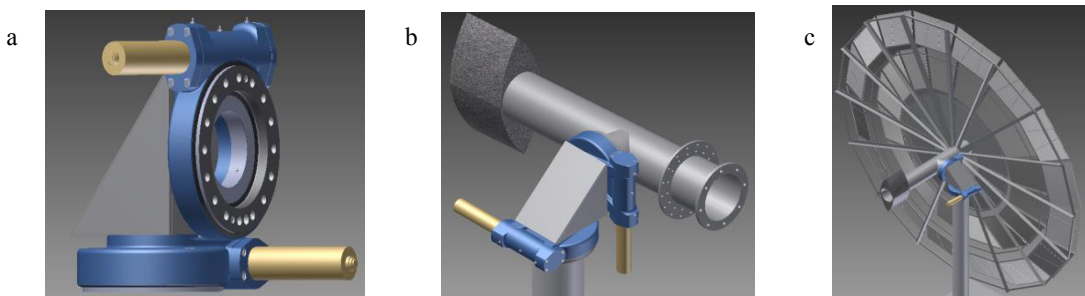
CAD drawing & pictures of the supporting pedestal, dual-axis pivoting slewing actuator mechanism with DC motor drive assembly.
